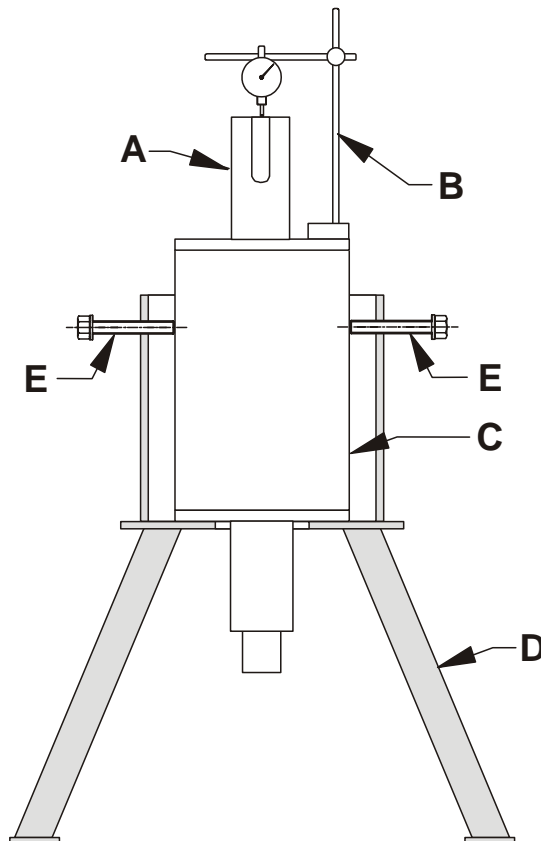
Bearing cylinder housing support & bearing clearance: Shaft(A), Dial test indicator (B), Bearing cylinder housing (C), Support stand (D), Securing screws (E).
